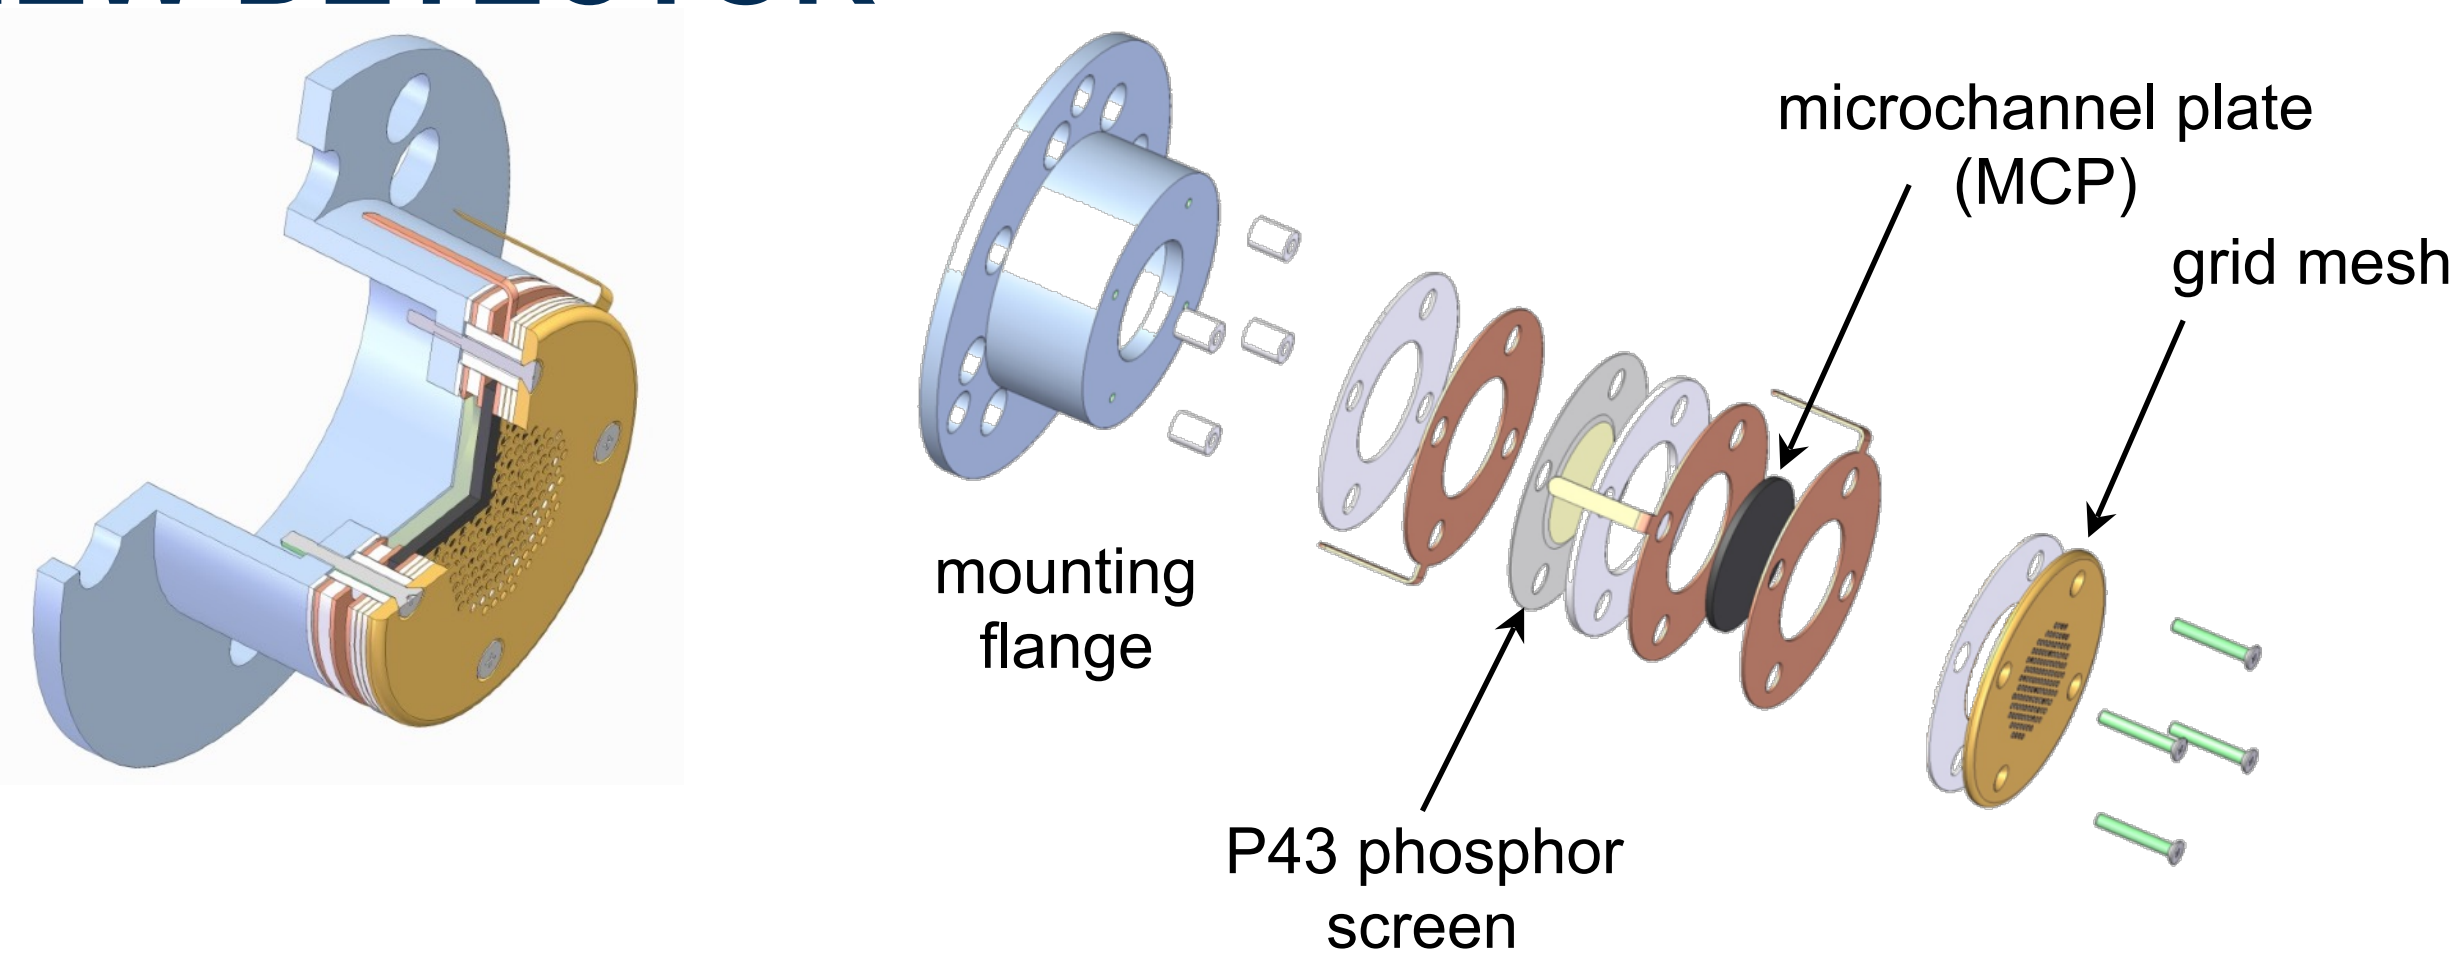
Schematic diagram of the modified TESS photoemission electron detector. LEFT: mounted detector assembly. RIGHT: exploded view shown.
